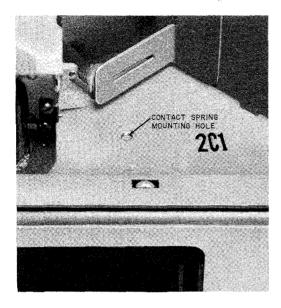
♦Location of Contact Spring Mounting Hole in 2A, 2C, or 2D Telephone Sets€
